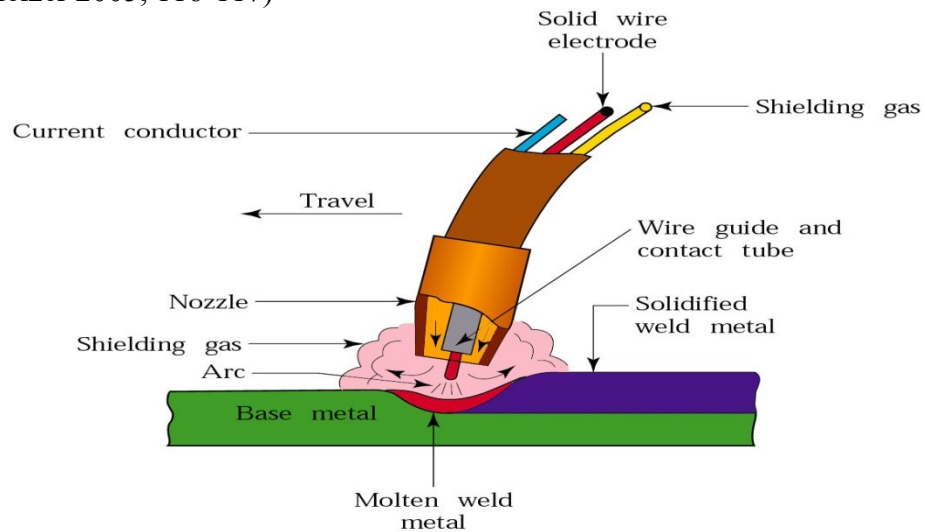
Gas metal arc welding process (Väisänen 2013.)
